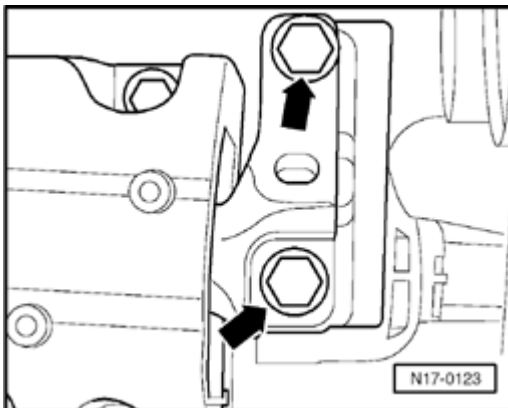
Identifying Engine Side Of Assembly Mounting At Engine Bracket At Top
